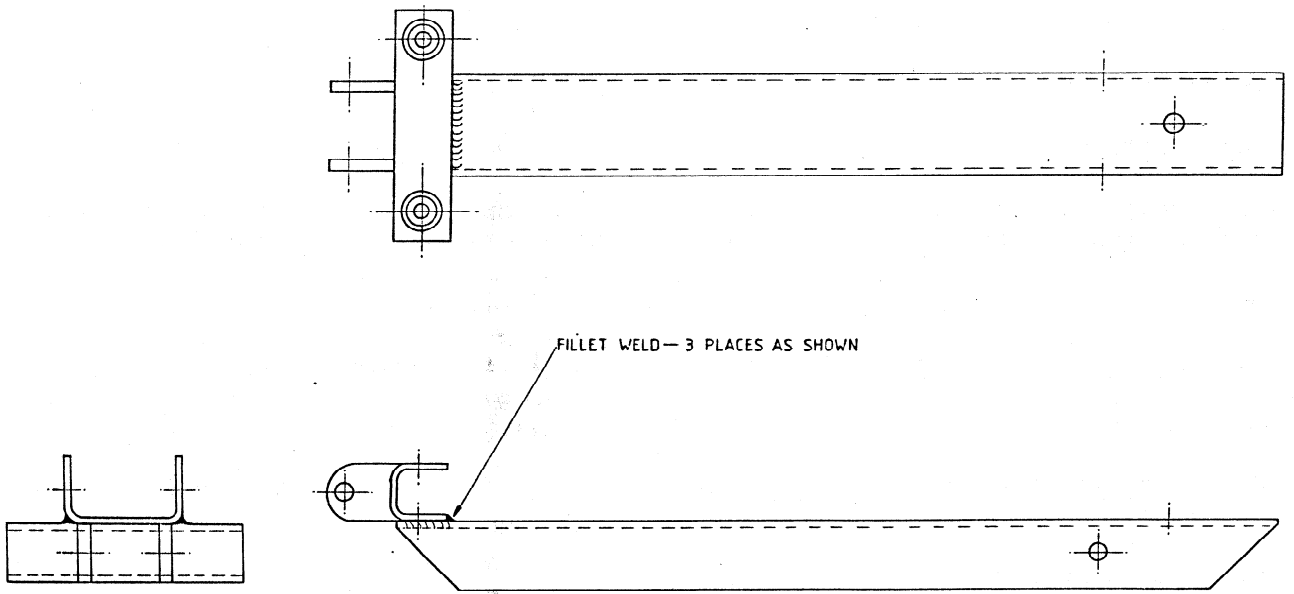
SEAT LEG SUPPORT WELDING DETAILS
